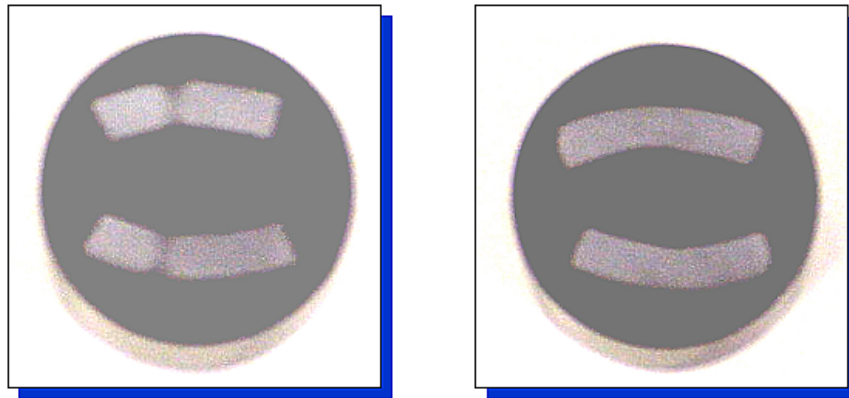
Weld Zone Before and After Seam Annealing
